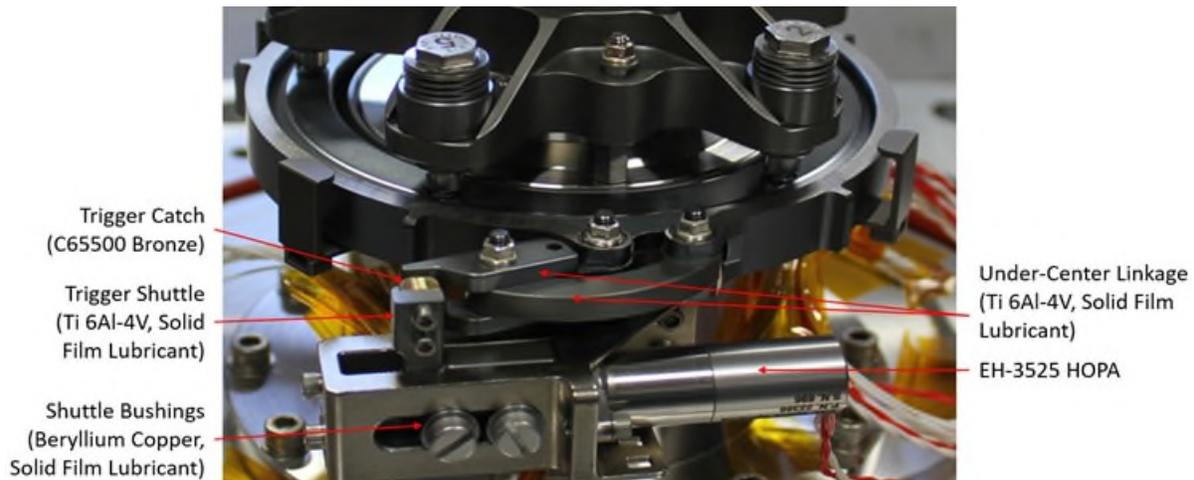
Stowed clamping and under-center latch on flight mechanism. The under-center latch assembly required use of components with different materials and the use of non-evaporable lubricants. Credit: Sierra Space Corporation
